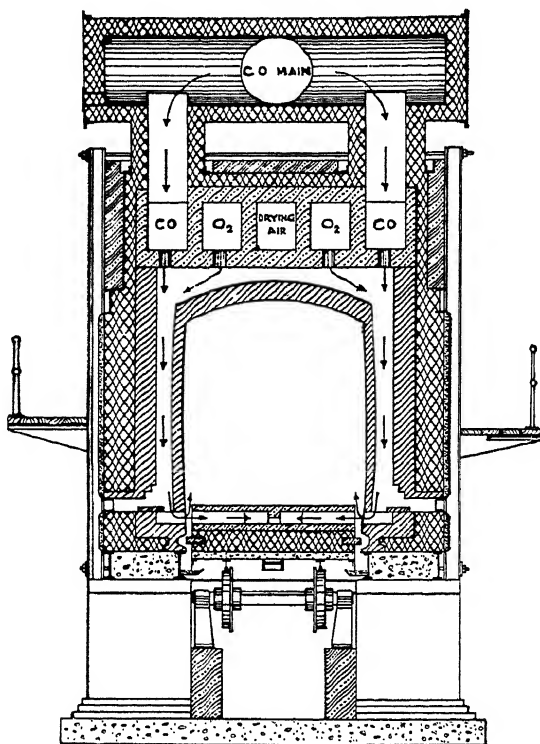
Continuous kiln: (C) W-D circular tunnel kiln.
